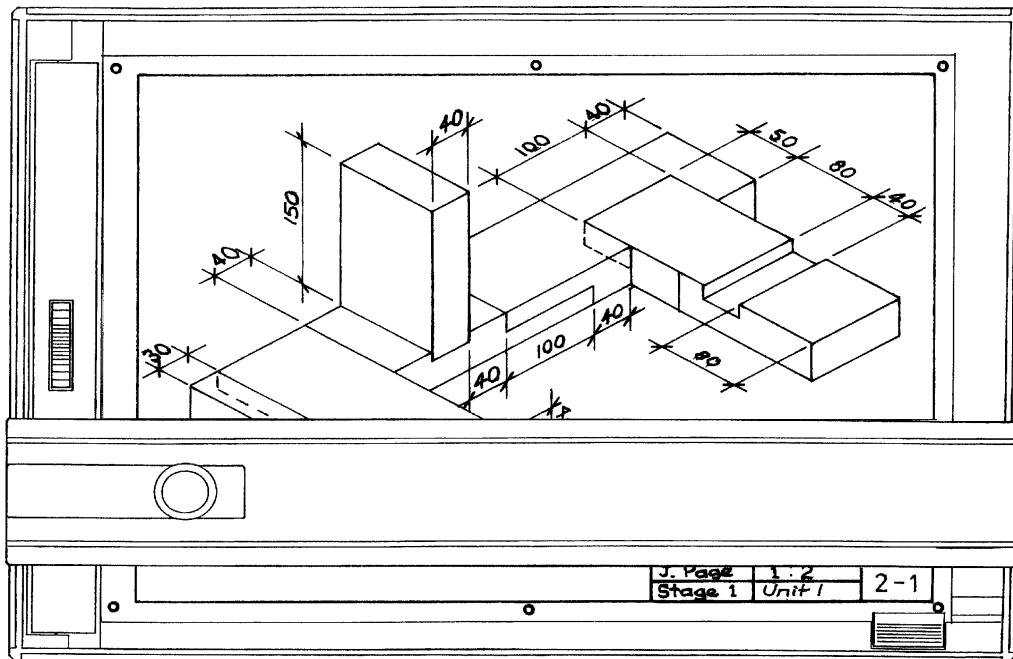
Typical portable drawing board for use with A3 and A4 paper
